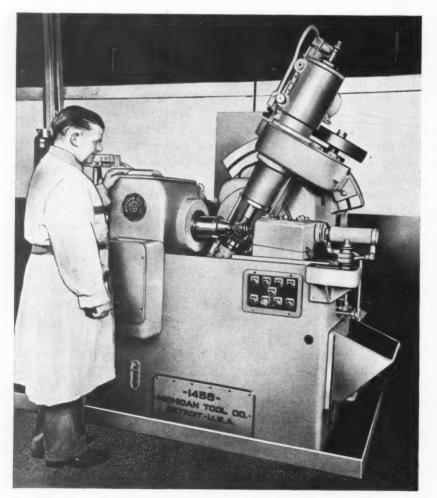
High-speed production type gear-hobbing machine developed by the Michigan Tool Co.
